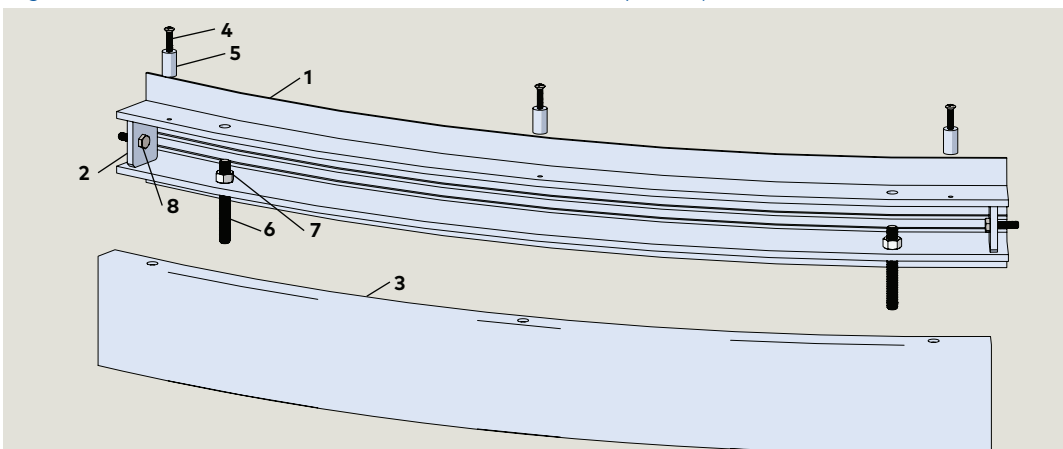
Aluminum enclosure base and cover assembly example
